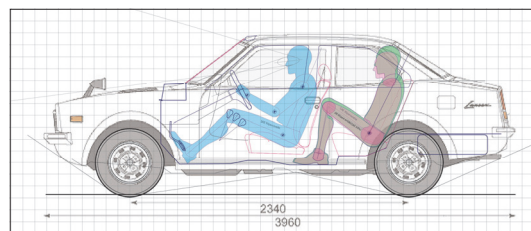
Package layout of Mitsbishi Lancer A70 coupé, 1973
